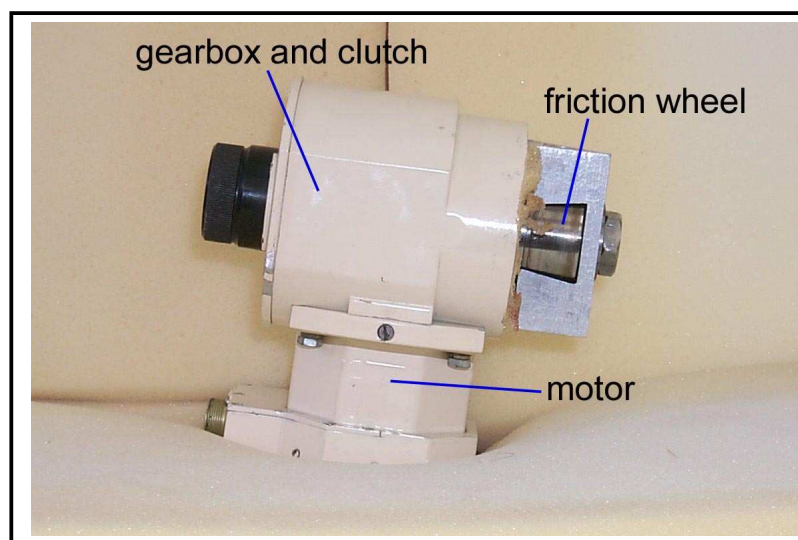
Photograph of the azimuth drive assembly removed from the mount (see figure 6.4).
